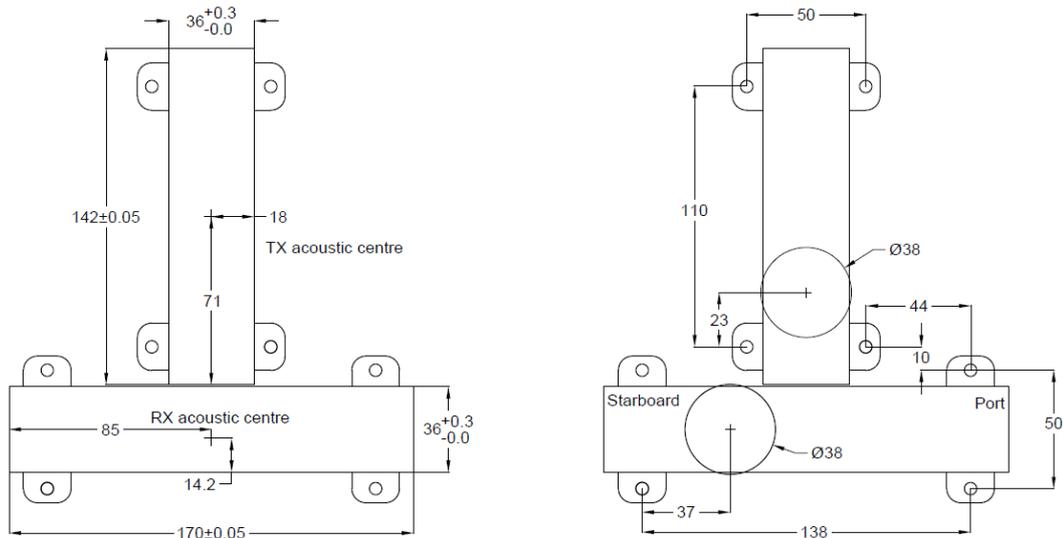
PicoMBES-120SF, for Seafloor System's EchoBoat™, mounting drawing
